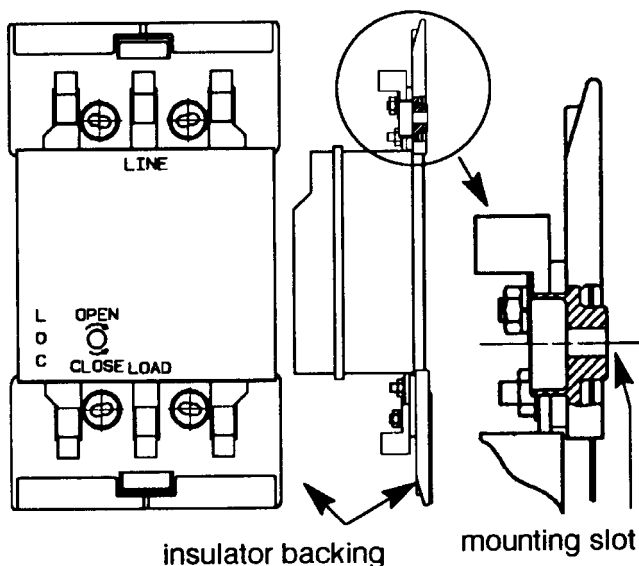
Required insulator bushings and backing insulators for RC Switches mounted on subpanels.
